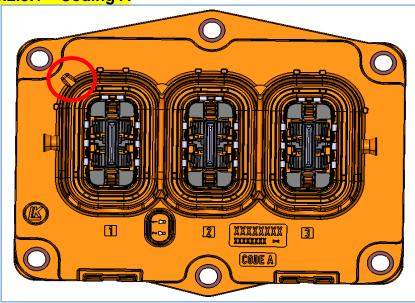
Tab header KHV 600 3way Code A to receptacle housing
